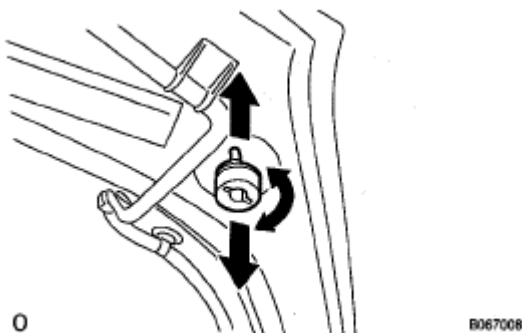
Adjusting Height Of Hood Front End Using Cushion Rubber
